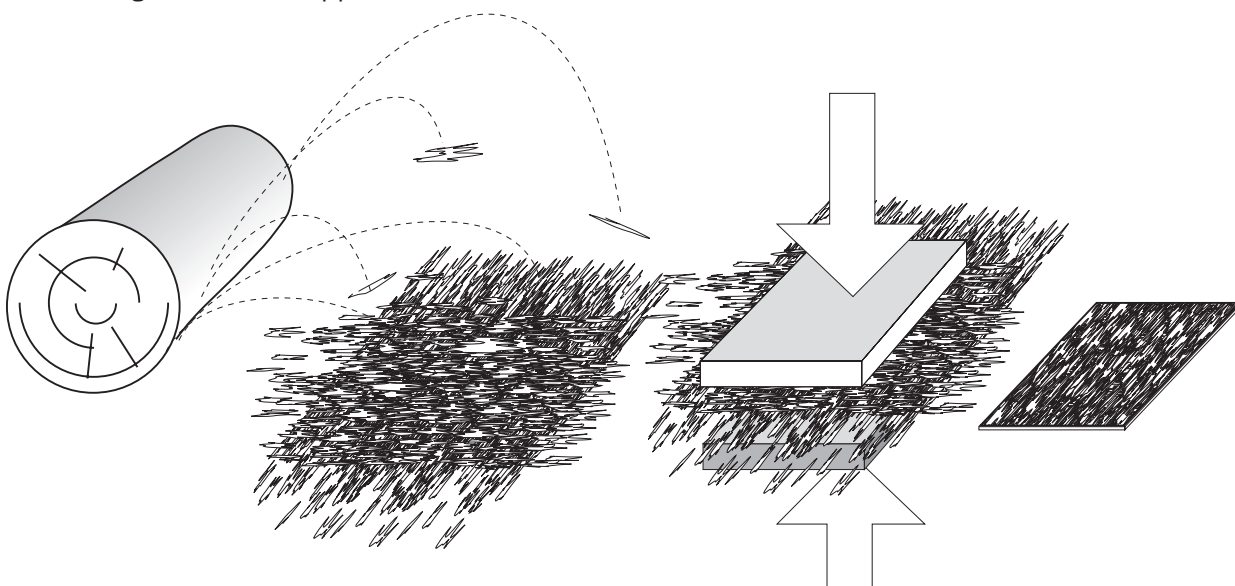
OSB is manufactured from strands of wood 6 inches long and 1 inch wide. The strands are oriented in a horizontal direction as they are placed on a mat for pressing.
